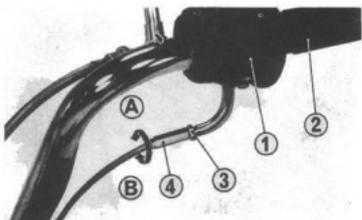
① Switch case ② Throttle grip ③ Lock nut ④ Upper adjuster
